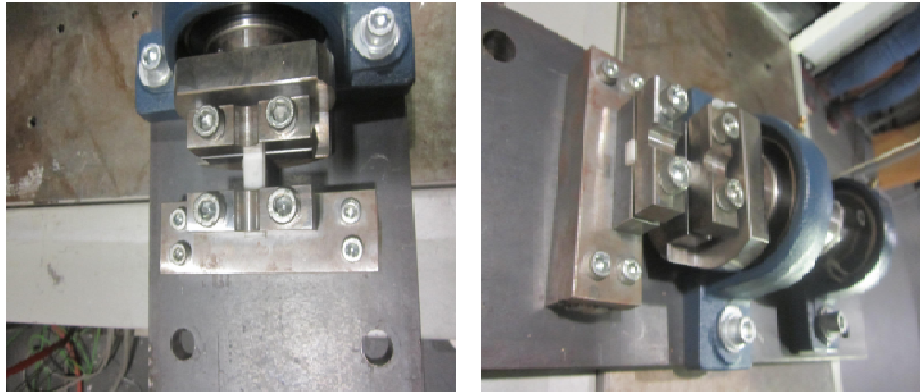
Specimens tightened to rectangular sockets fitted to torque shaft in one side and fitted to input shaft on the other side
